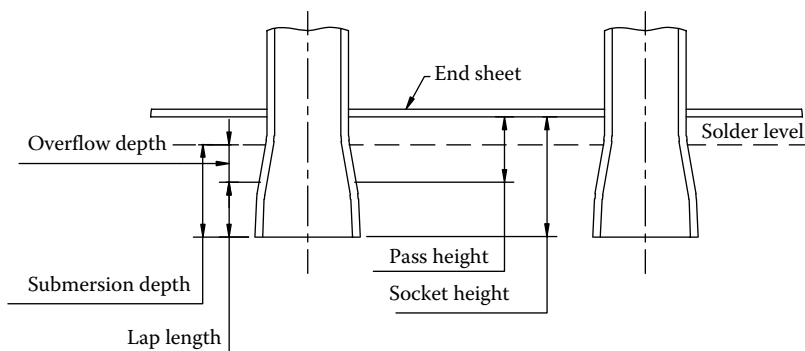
Socket geometry of heating/cooling coils for ultrasonic cleaning. (Adapted from Schuster, J.L. and Chilko, R.J., *Weld. J.*, October, 711, 1975.)
